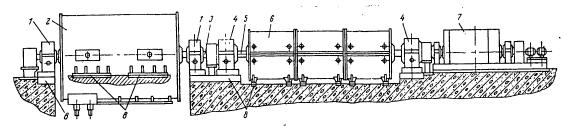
General view of the unit. 1, 2, 3 -- bearing, stator and rotor of the generator, respectively; 4, 5, 6 -- bearing, shaft and flywheel housing respectively; 7 -- induction motor; 8 -- base plates.
